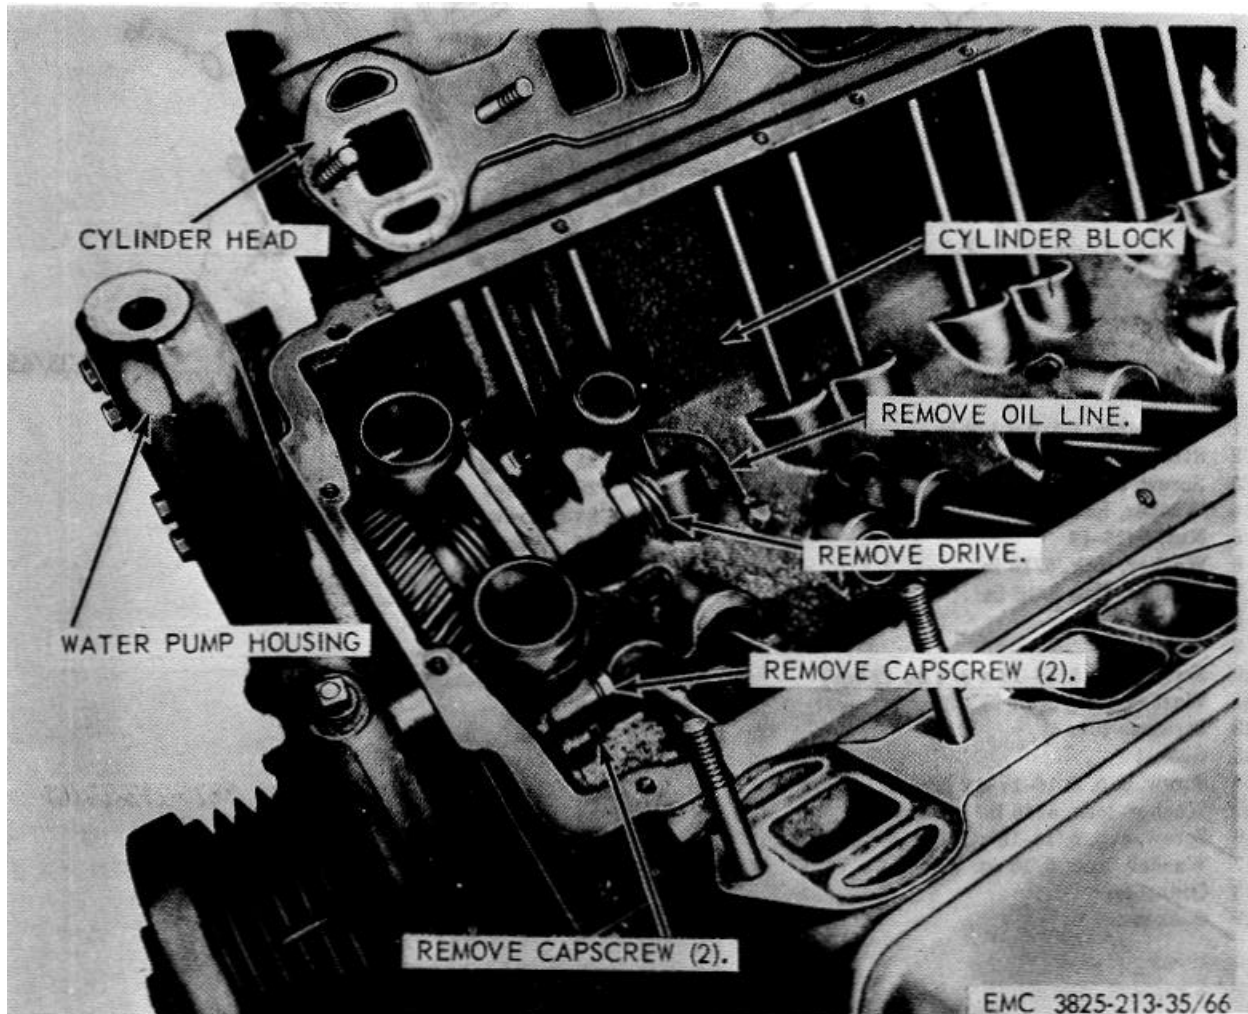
Plow and carrier engine, distributor and governor drive assembly, removal and installation.
